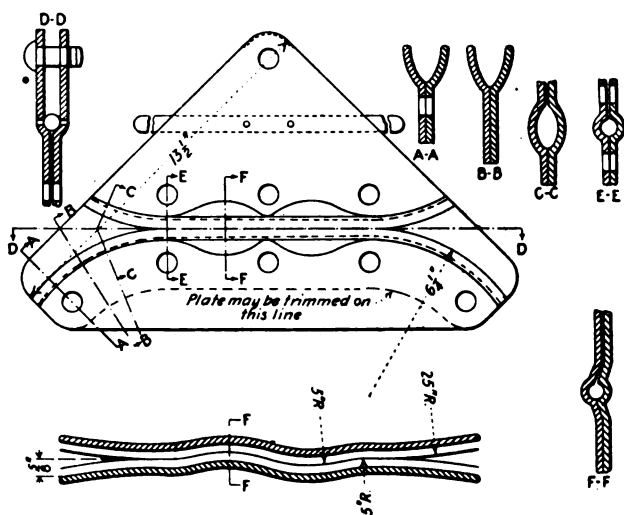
MISSISSIPPI RIVER POWER CO. CONDUCTOR CABLE CLAMP
